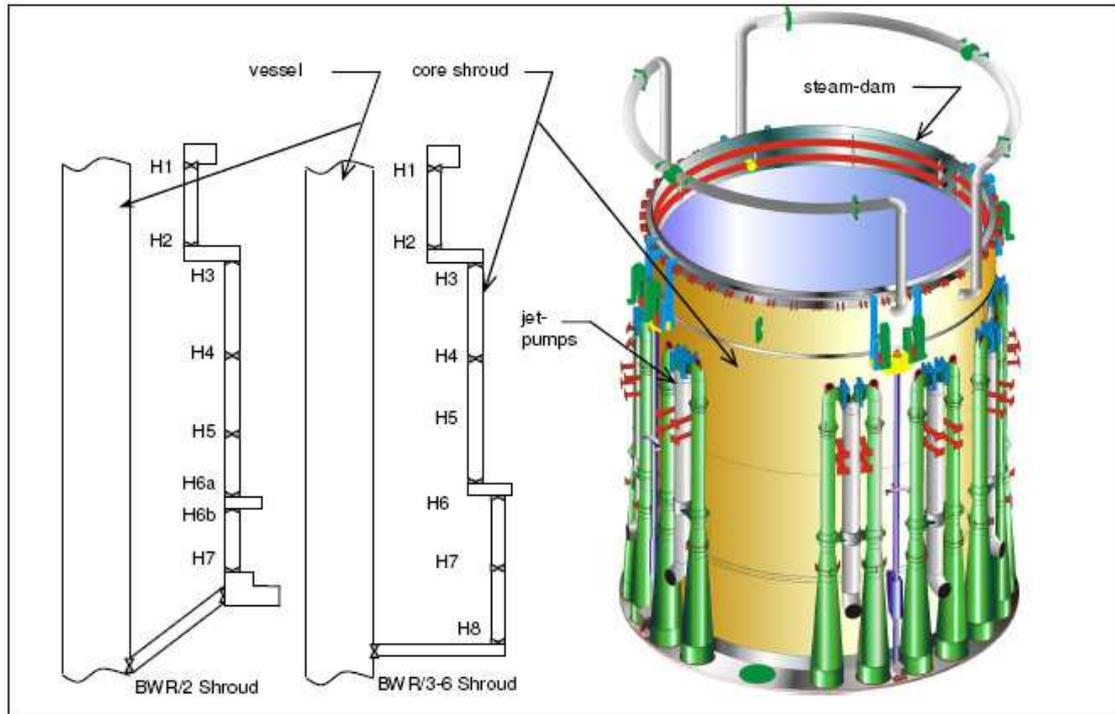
Typical BWR shroud arrangement and weld configuration
